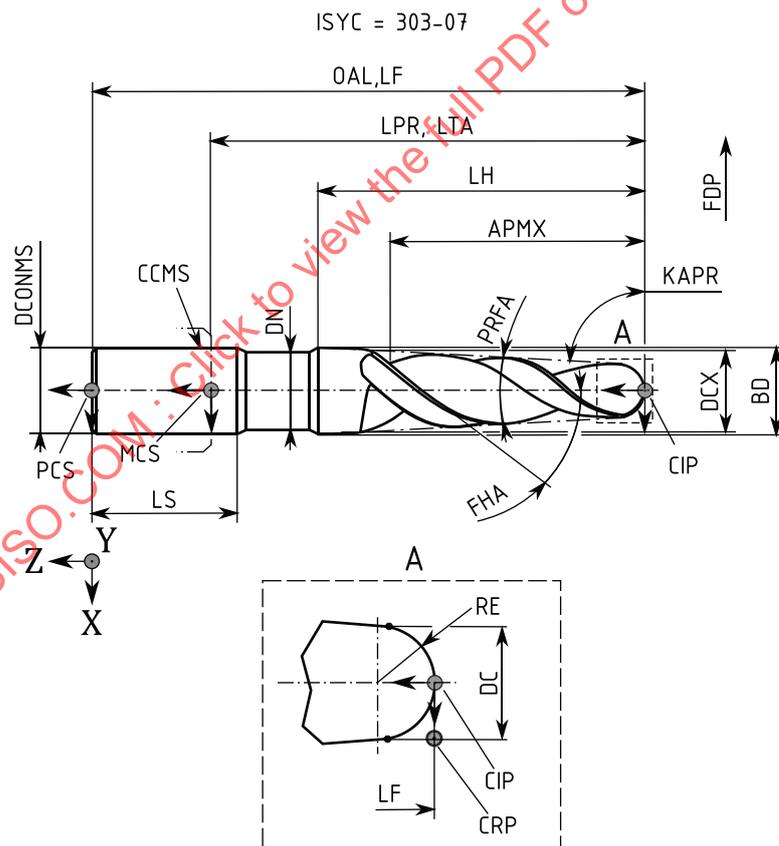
ISYC 303-07 - Tapered ball-nosed end mill, solid
